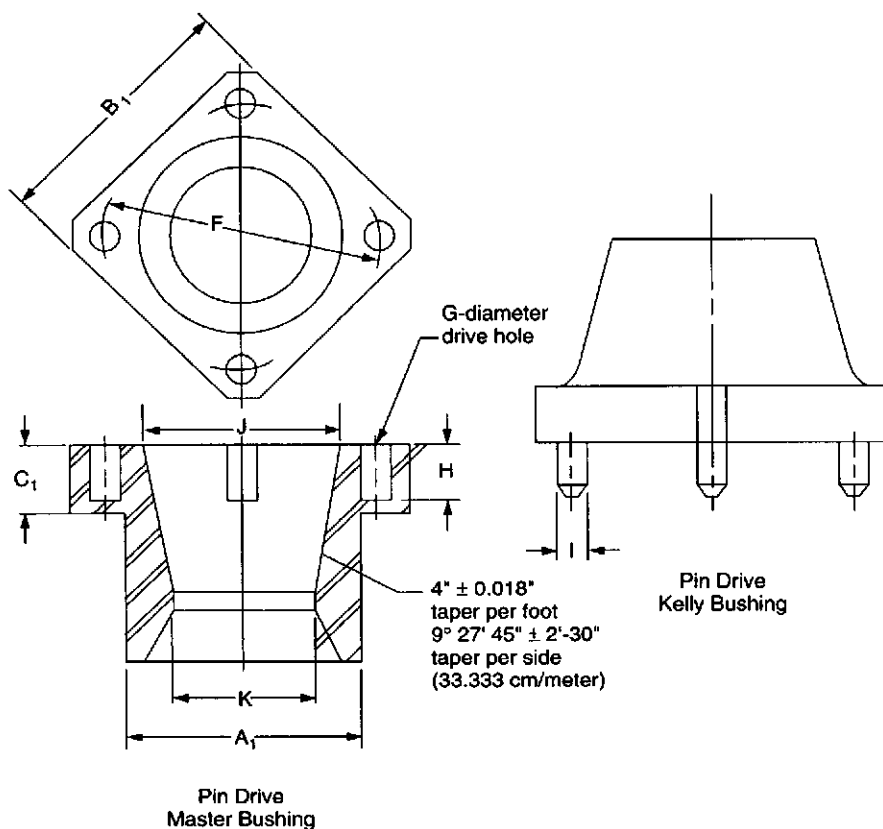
Pin Drive Master Bushing and Kelly Bushing
